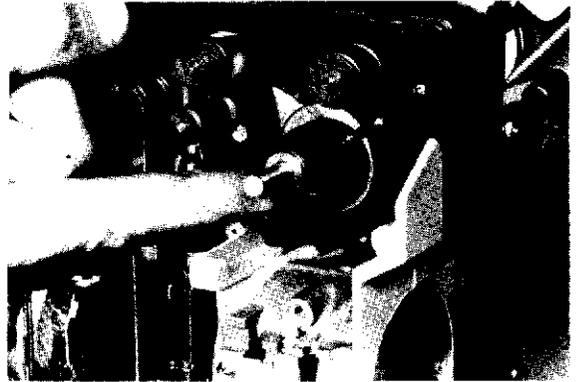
LOOP SETTING GEAR AND ARBOR OPERATION
